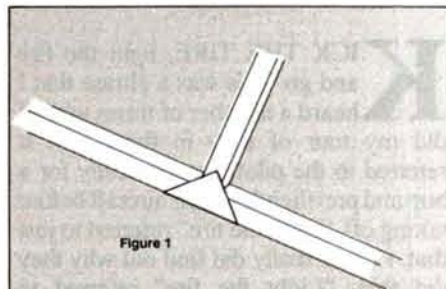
Typical single gusset applied to joint between fuselage vertical member and longitudinal stringer.
